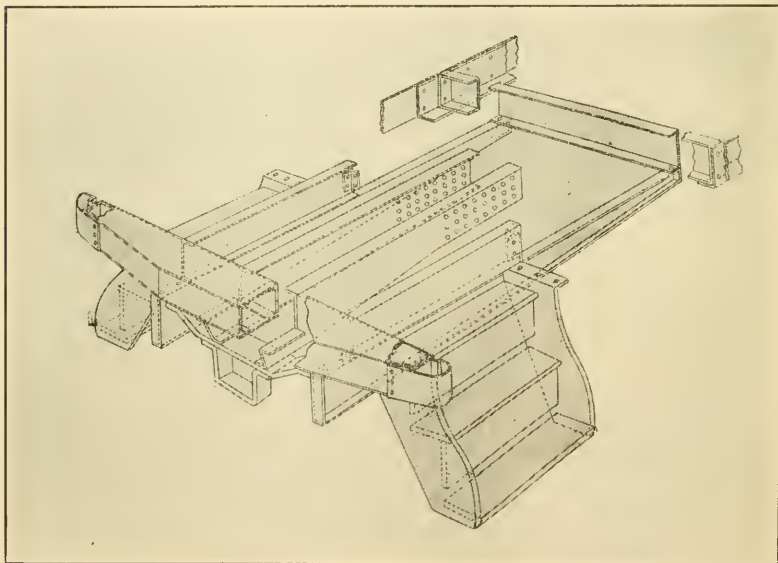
SKELETON OF PLATFORM MEMBERS FOR ALL-STEEL CONSTRUCTION
